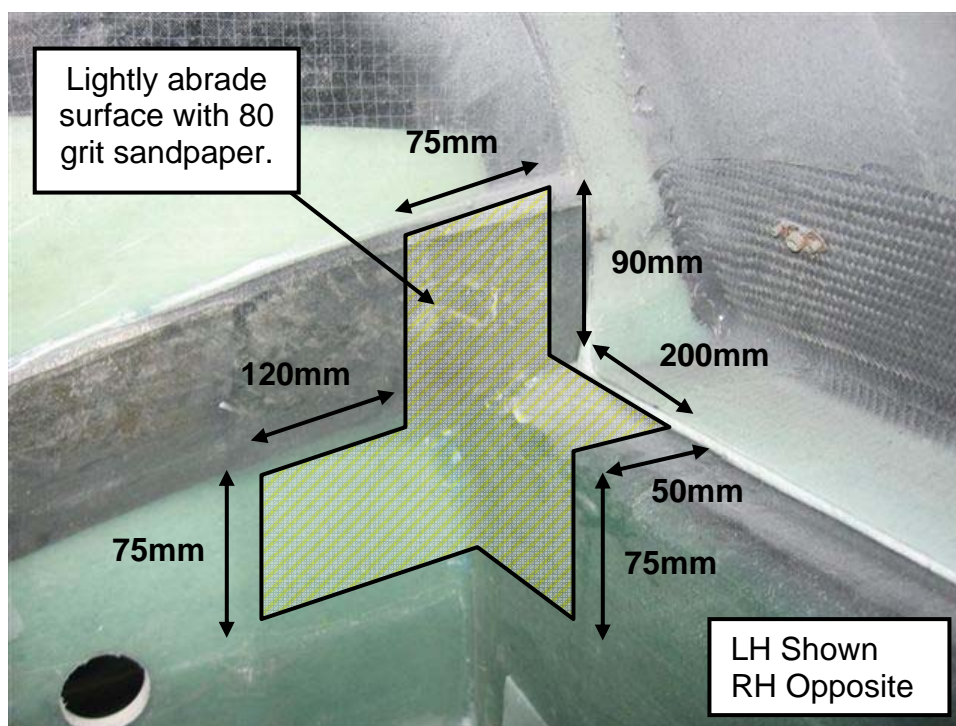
Gusset Bonding Area – View Of LH Upper AFT Spar Bridge
